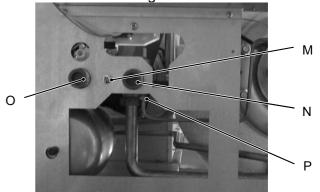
9) Remove the diverter group and refer to the exploded view (Figure 9) to remove the internal parts of the three way diverter valve.
